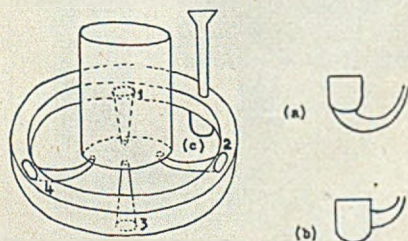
RING RUNNER AND HORN-GATES FOR CIRCULAR CASTINGS.
